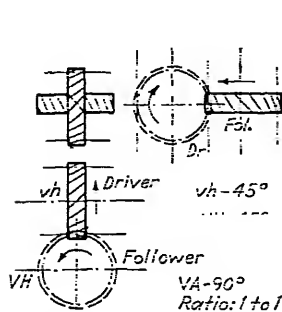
Right-angle spiral gears of common pitch diameter and helix angle.
